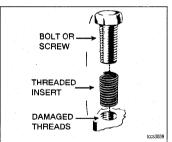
Damaged bolt hole threads can be replaced with thread repair inserts
